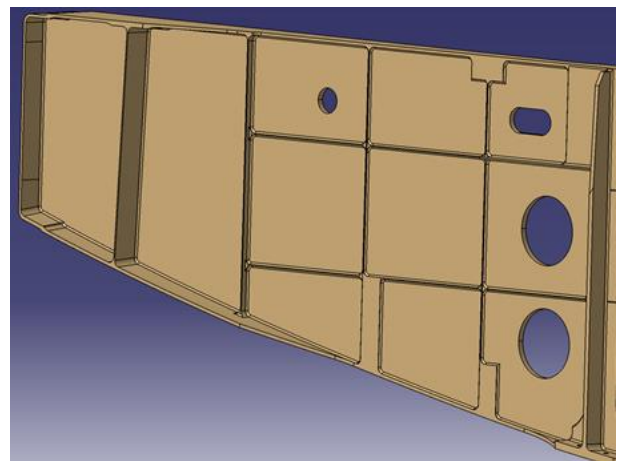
Structure of aircraft beam designed for HSM milled using the HSM method. HSM, high-speed machining
